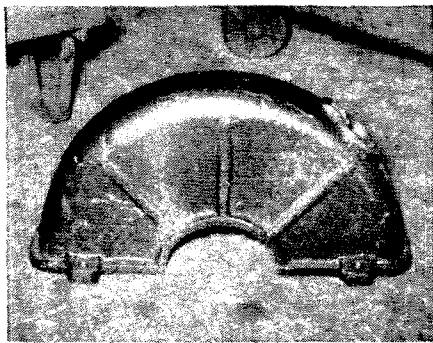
Original construction of gear case cover weighed 66 pounds... required milling of bottom edge for oil-tight seal with gear case.
